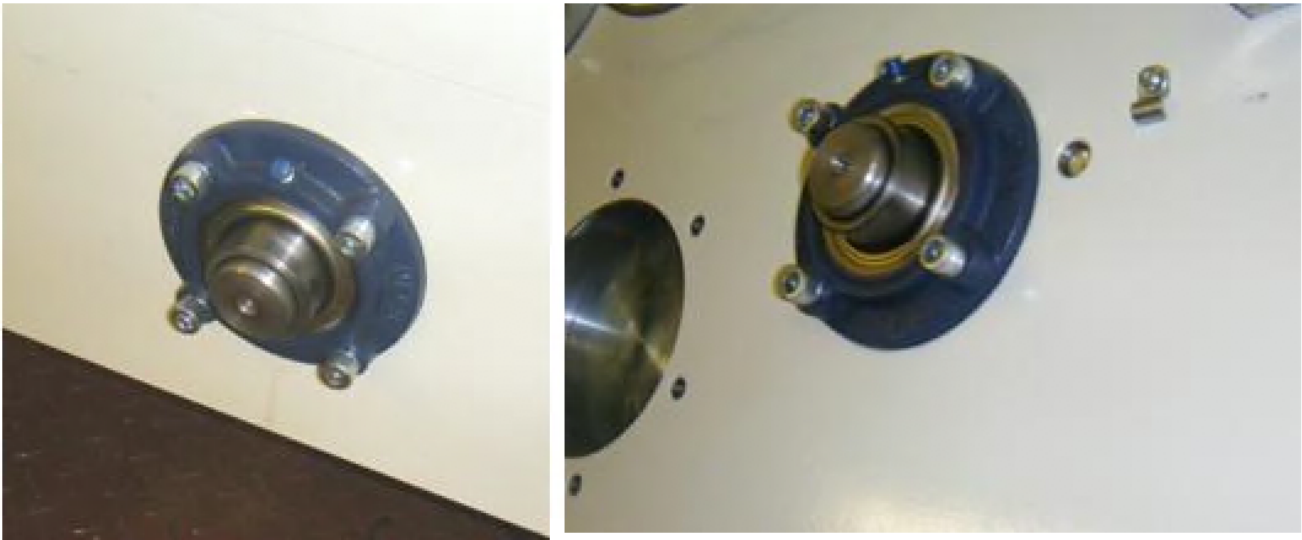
Layarm belt drive flanged bearing cartridges
